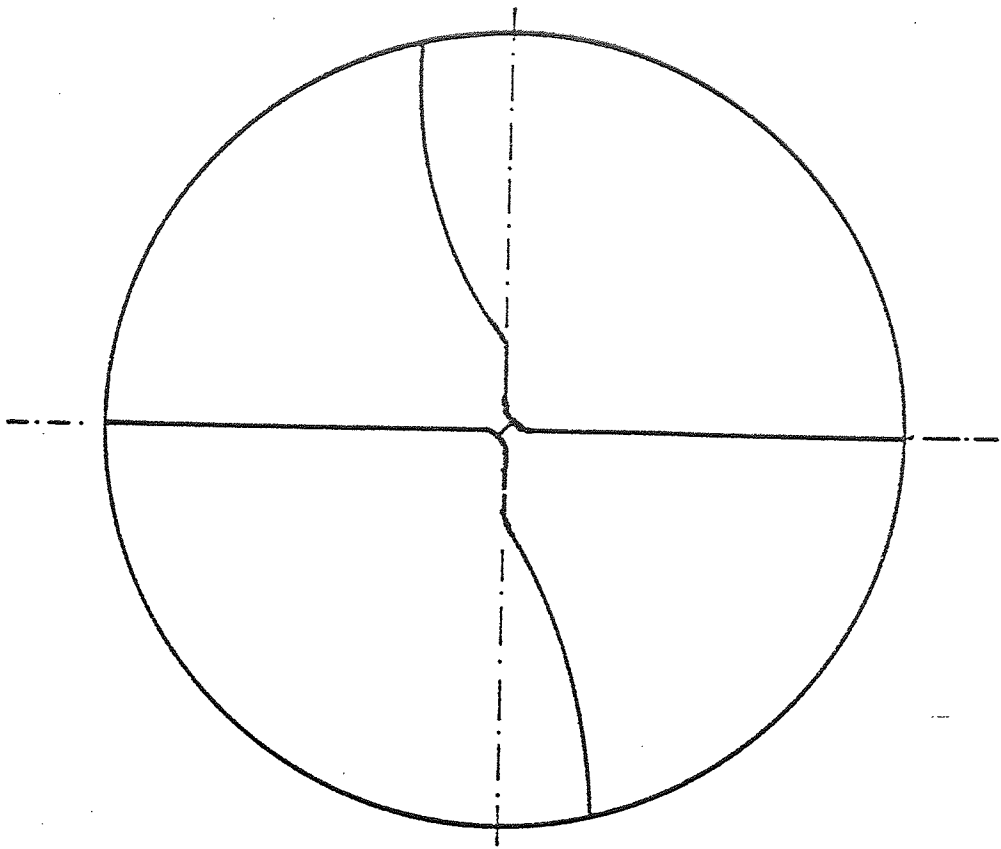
Grinding wheel setting for the extension of the diameter of the workpiece
